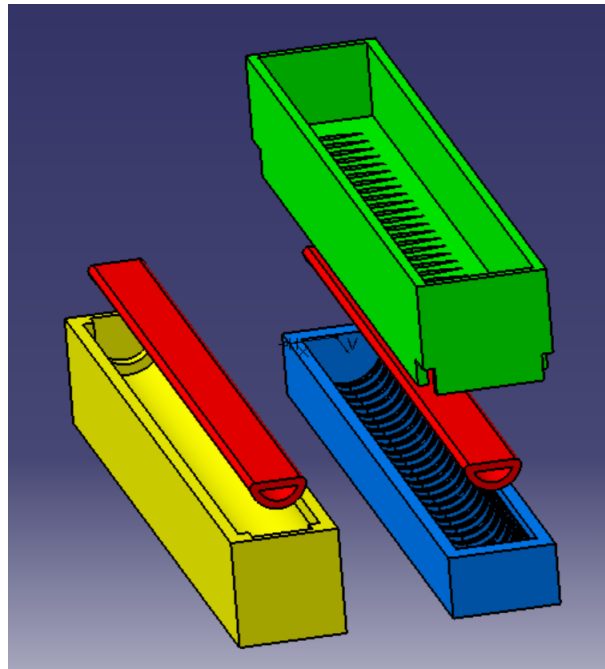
The final design of the McKibben mold is illustrated in this exploded view, with the green-colored top mold, blue-colored bottom mold, yellow-colored sealing mold and red-colored core all clearly displayed.
